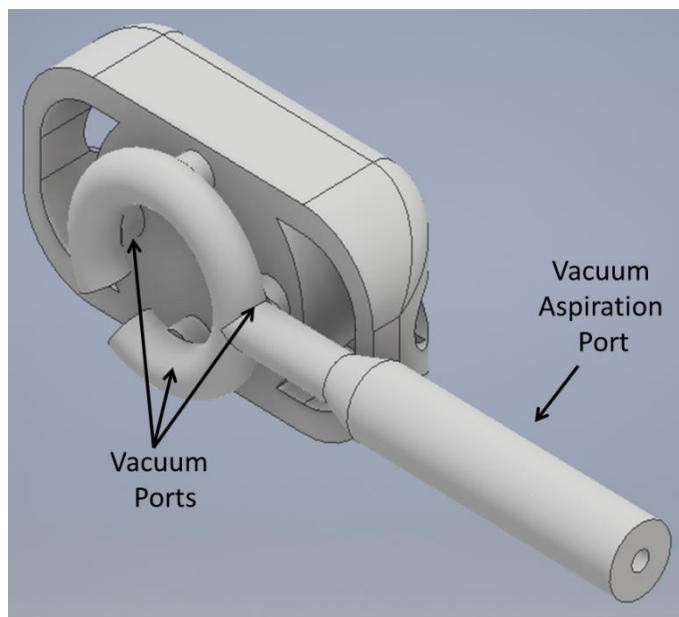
CAD design of a capsule compatible with the BIN (bottom-view).
